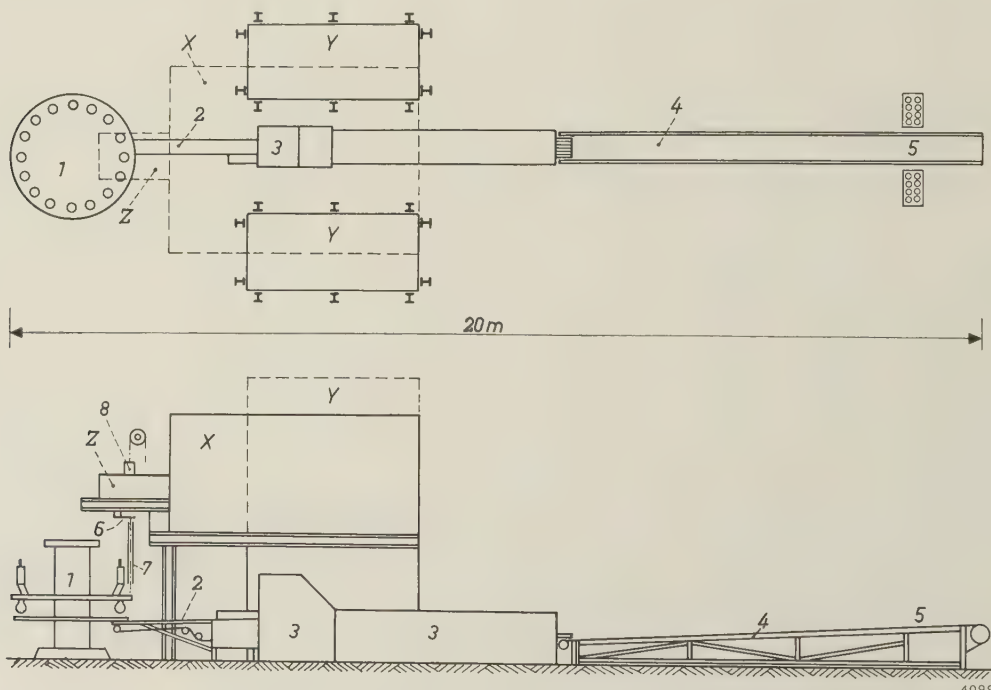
Schematic layout of a manufacturing unit for the mechanical production of electric-lamp bulbs. a) Plan, b) side view. The whole plant is contained within a rectangle of $20 \times 5\frac{1}{2}$ metres. X glass furnace. Y furnace recuperators, in which the outflowing combustion gases heat the air flowing to the burners. Z part of glass furnace from which the bulb-blowing machine 1 is fed. The blown bulbs are carried by the conveyor 2 to the annealing oven (lehr) 3 (underneath the glass furnace), and by the conveyor belt 4 to the sorting room 5, where all bulbs are inspected. 6 shears for cutting gobs. 7 chute through which gobs drop into the receiving tray on the machine. 8 mechanism ensuring uniformity of the glass stream and constancy of delivery (see *fig. 12*).
